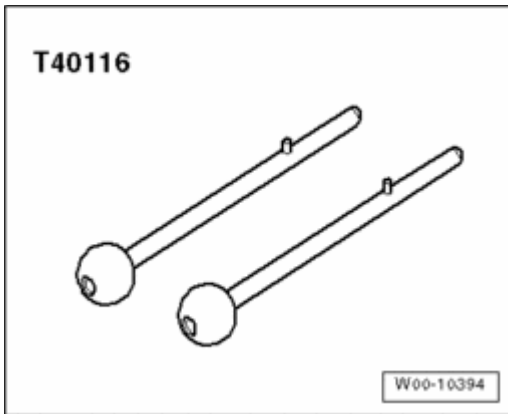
Securing Pins 1 Set = Qty. 2 T40116
